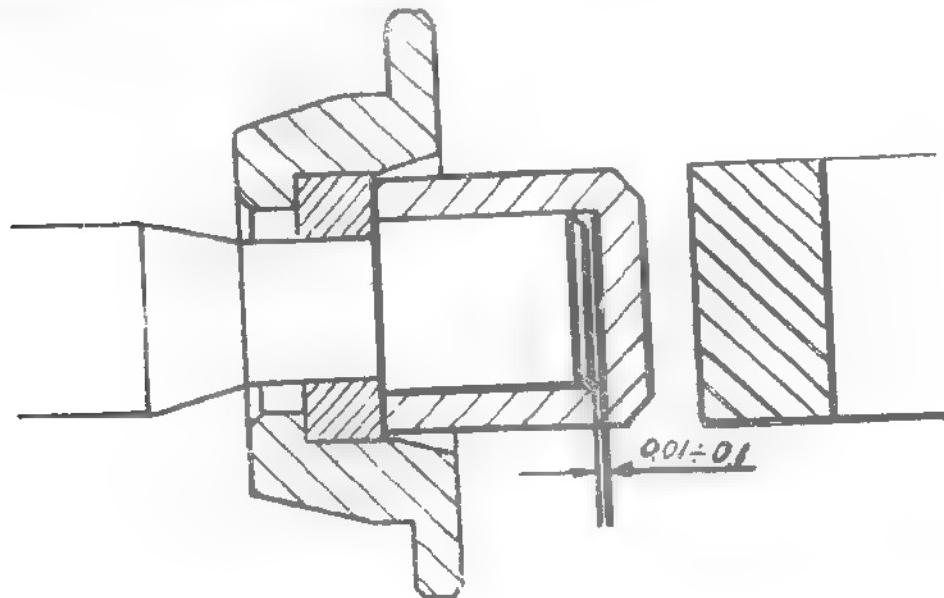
MEASURING DISTANCE BETWEEN VALVE STEM END AND DISC,
